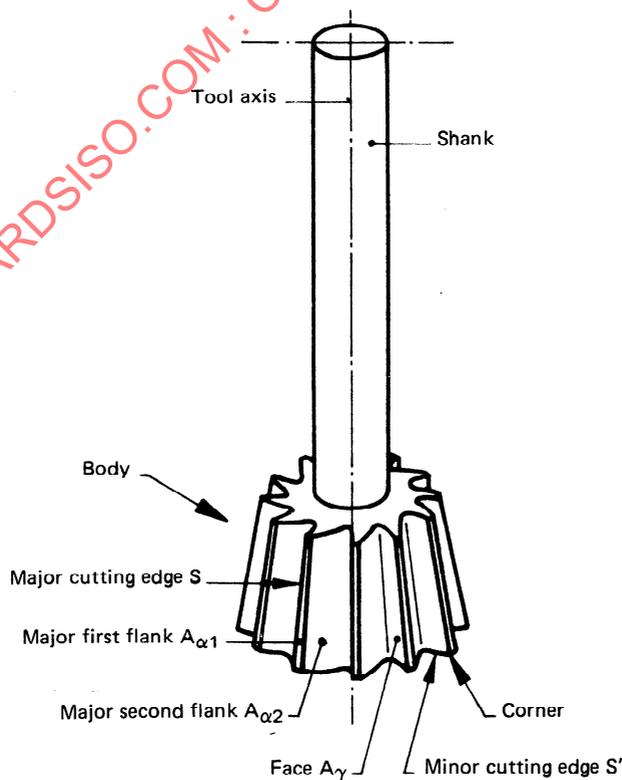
Cutting edges and surfaces on the cutting part of a single cutter with parallel shank
